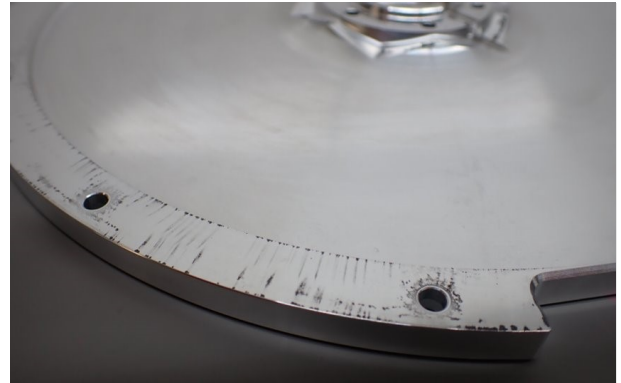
Excessive fretting damage seen during vibration testing of prototype design
